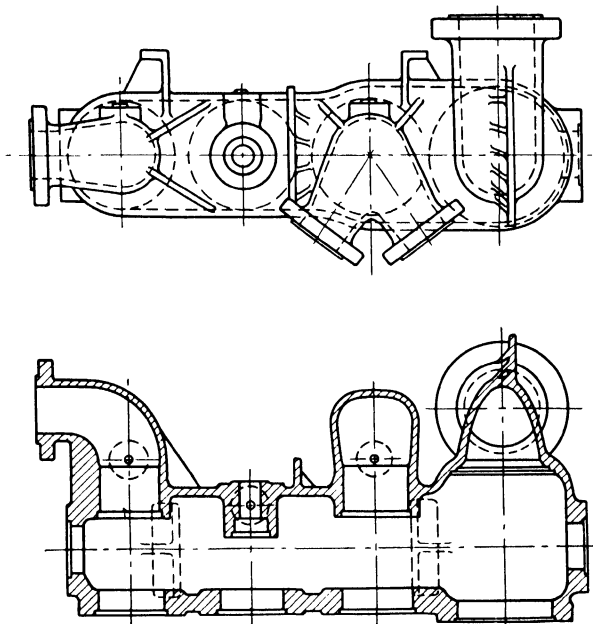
Throttle-valve casting—original design. (*Briggs, Gezelius, and Donaldson.*⁽⁴⁸⁾)
